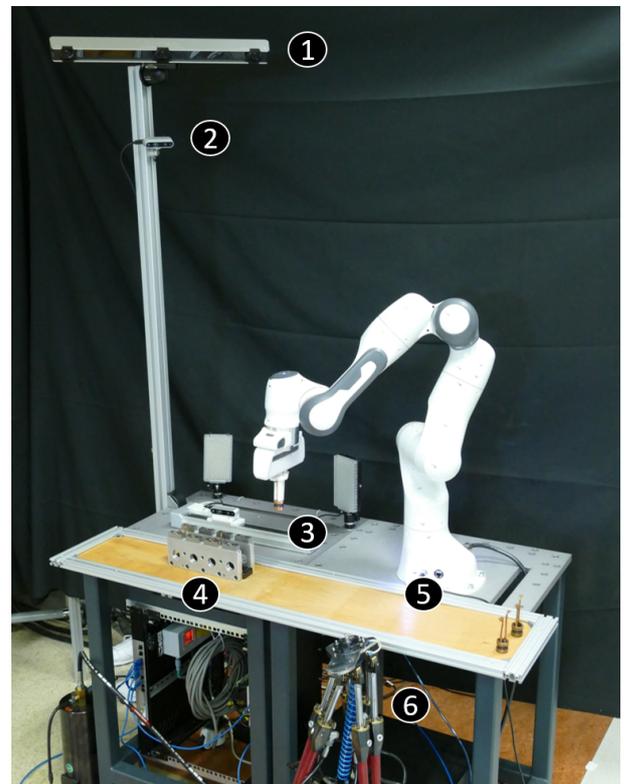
Modular collaborative assembly cell is composed of 1) motion tracker, 2) overhead human surveillance camera, 3) linear drive with assembly control camera, 4) casting molds, 5) collaborative robot, and 6) passive reconfigurable fixture (the transport tray for sliding rings is not mounted on the fixture in this picture).
